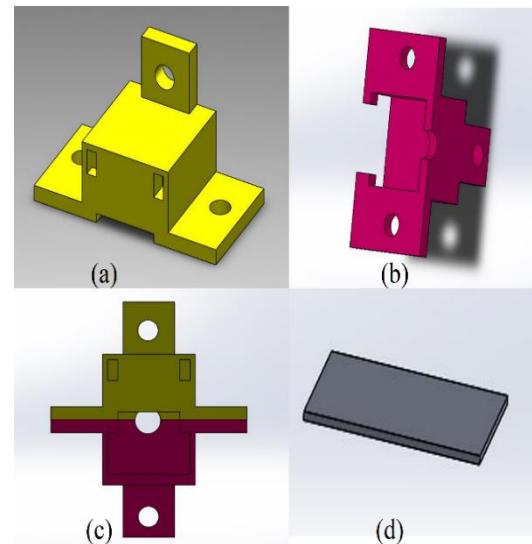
The connector and base components for gripper: a) the upper half, (b) The lower part, (c) Full view of connector after screwing upper half and lower half, (d) A square acrylic sheet as base for connecting three actuators.
